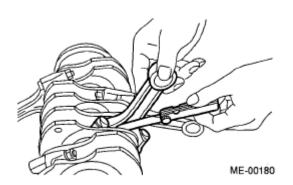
Checking Connecting Rod Side Clearance Courtesy of SUBARU OF AMERICA, INC.
